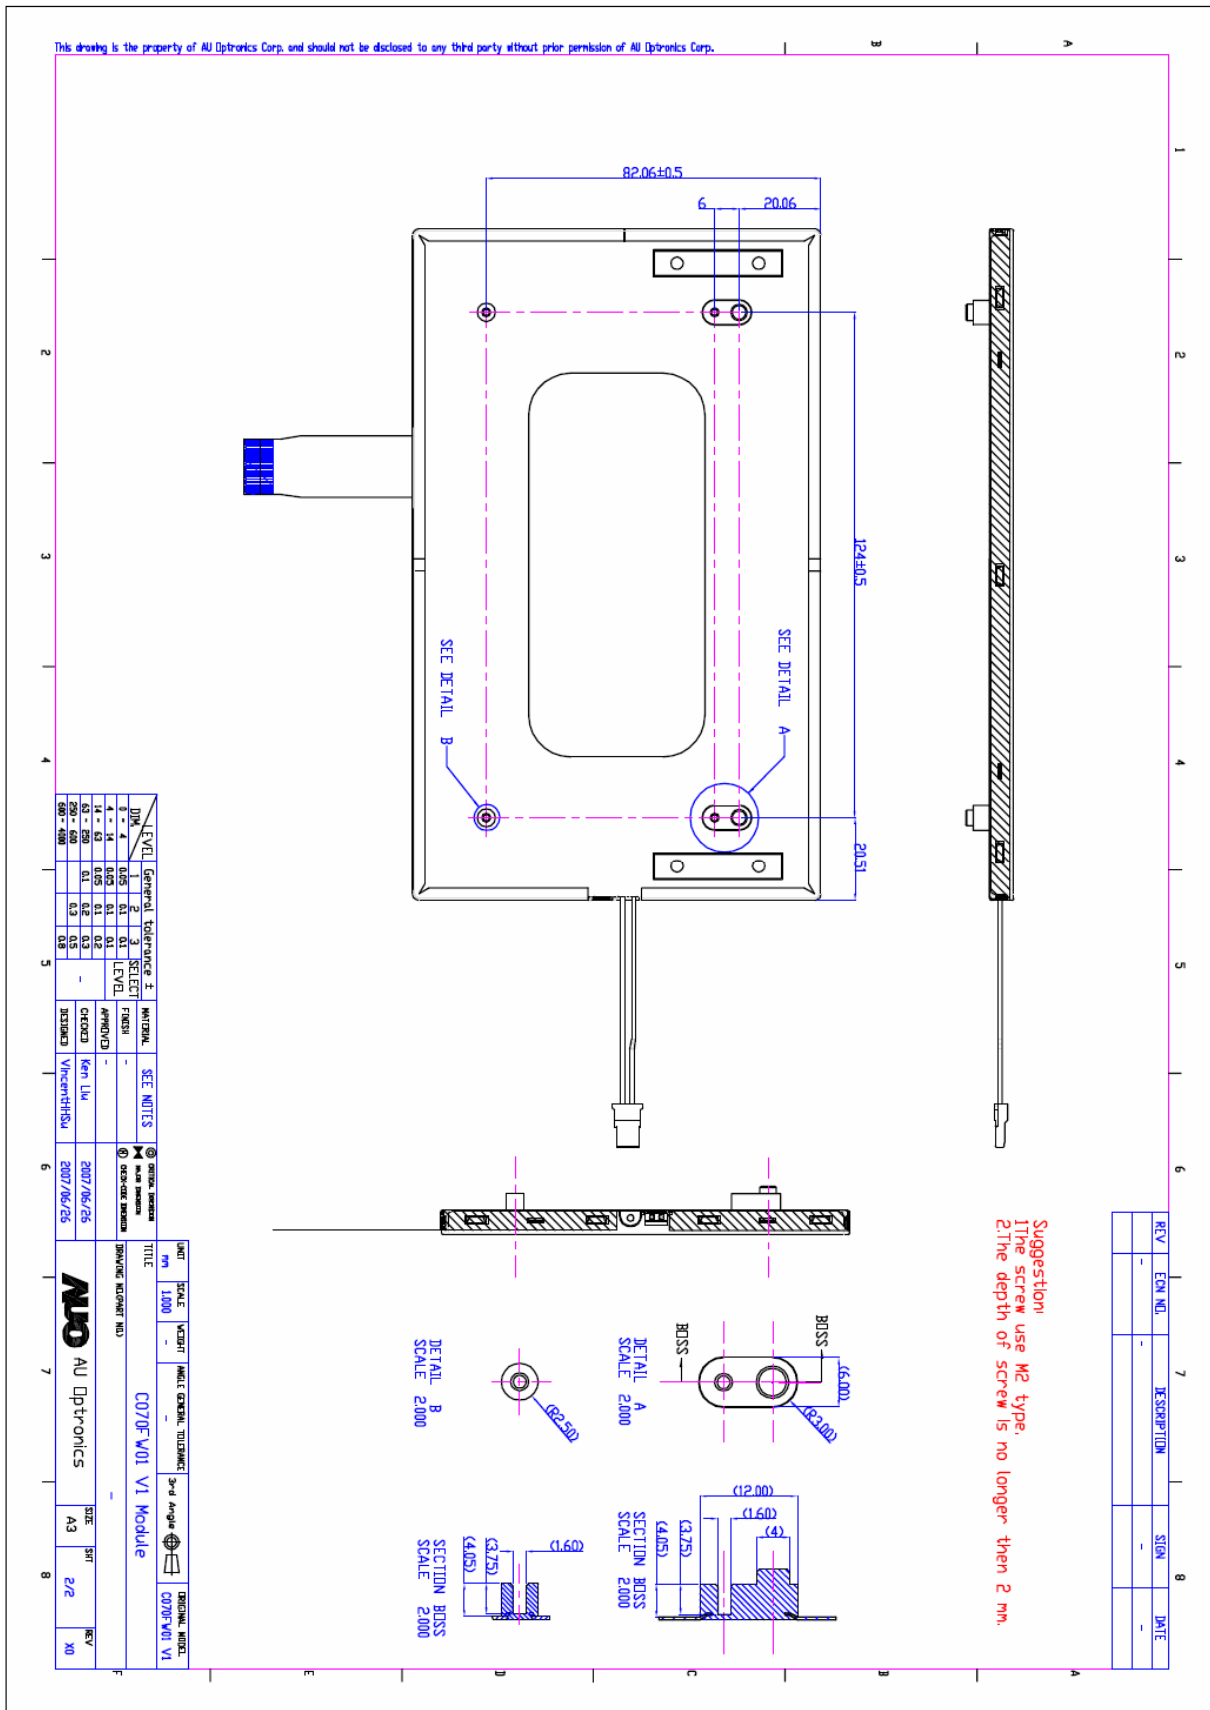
Outline dimension of TFT-LCD module(Front Side)
